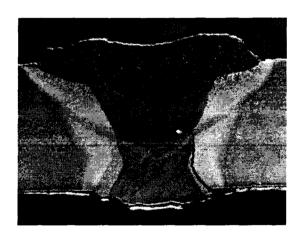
Typical Weld Photomacrograph (Crack Adjacent to the Weld)
